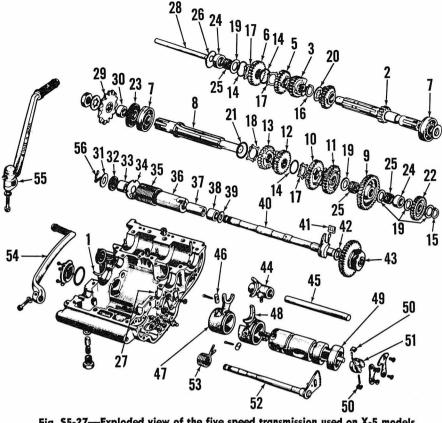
Exploded view of the five speed transmission used on X-5 models.
